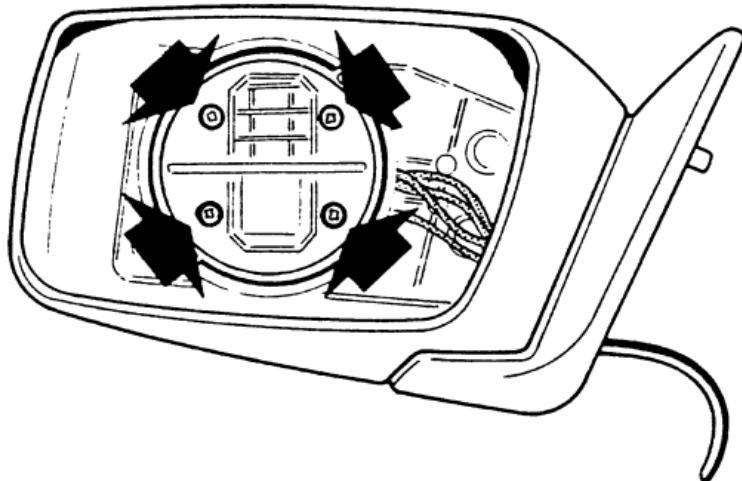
Location of the power mirror motor retaining bolts
